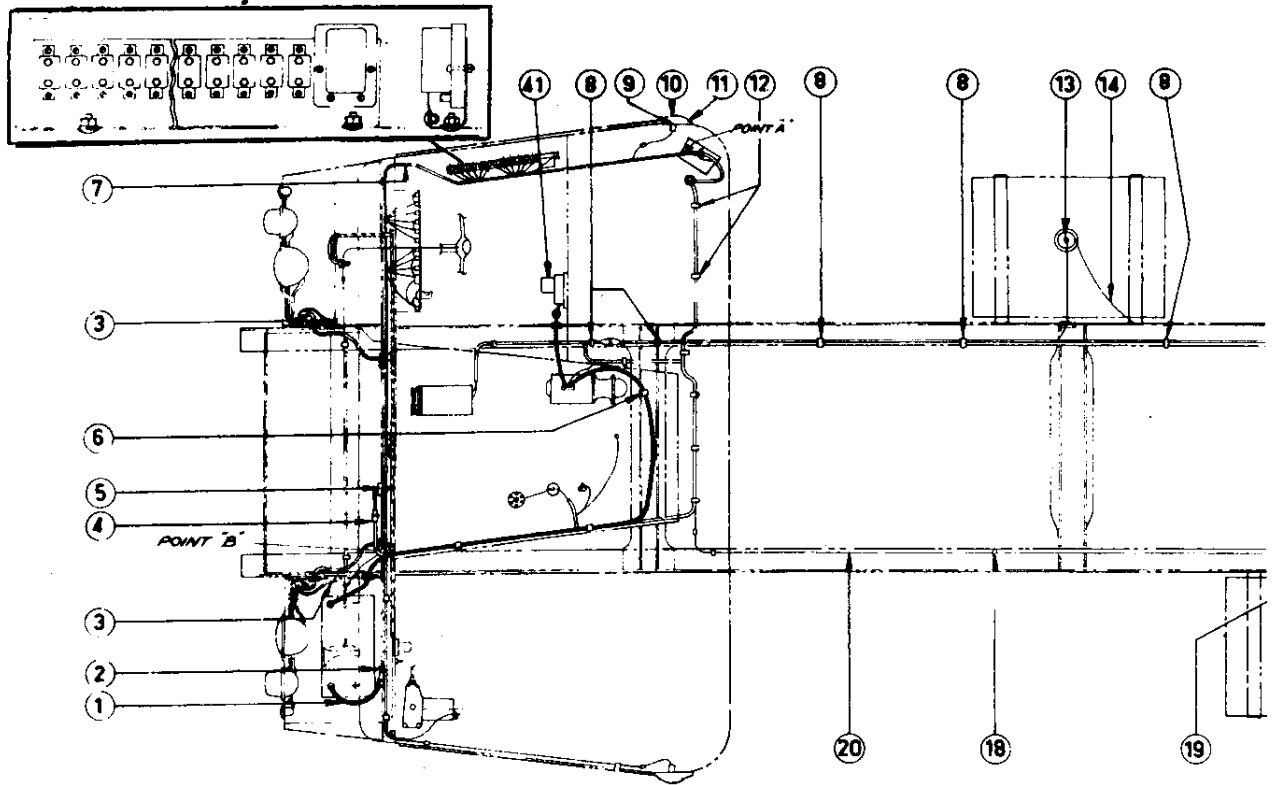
WIRING LAYOUT DIAGRAM (PLAN VIEW)
